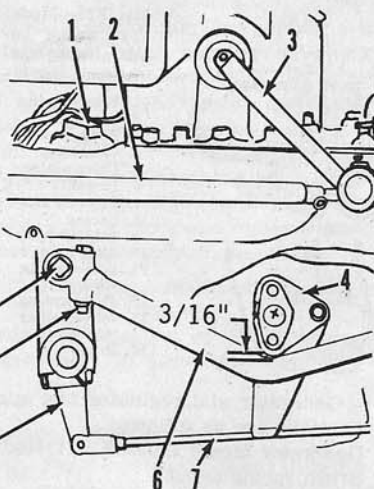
Models TE20, TO20, and TO30 clutch pedal adjustment. Loosen retaining bolt (9) and rotate clutch pedal (6) on clutch release fork shaft (5).
